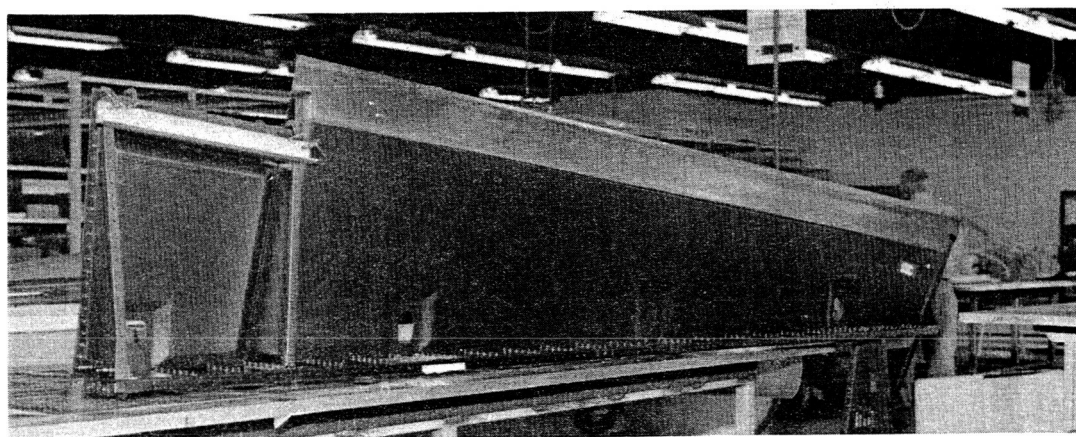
Assembly of Test 17 Outboard Test Box, Showing Assembled Lower Skin, Ribs, and Rear Spar
